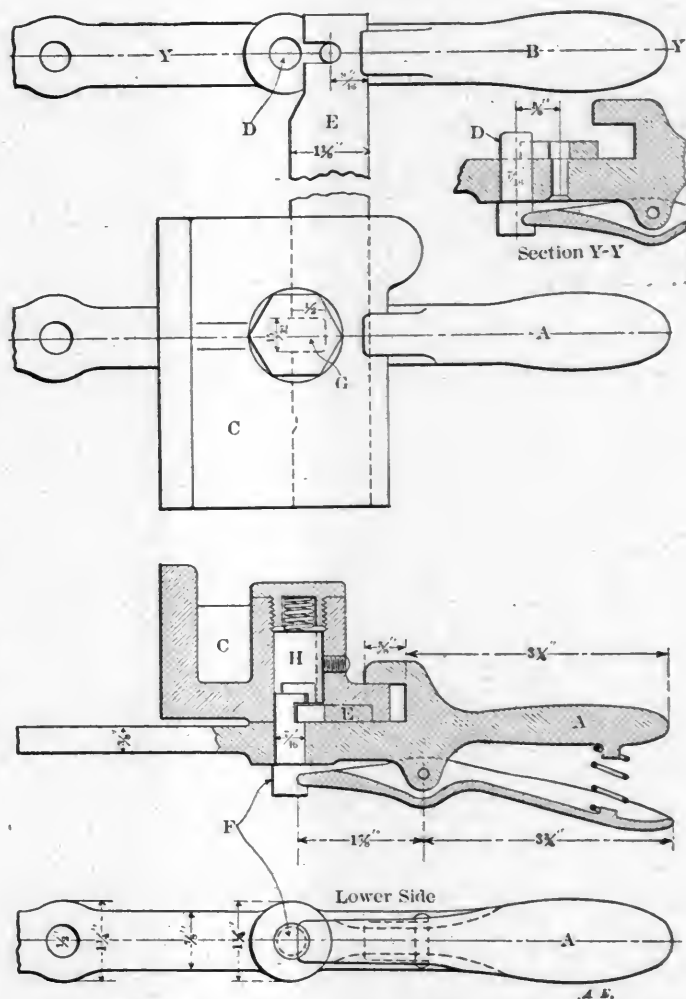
DETAILS OF CLUTCH HANDLE INTERLOCKING MECHANISM.
